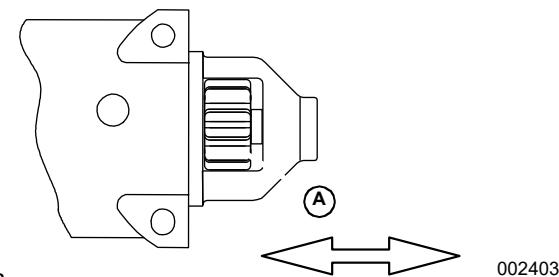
Check Pinion Gear Operation (V-Twins and units with 426cc Engine)
